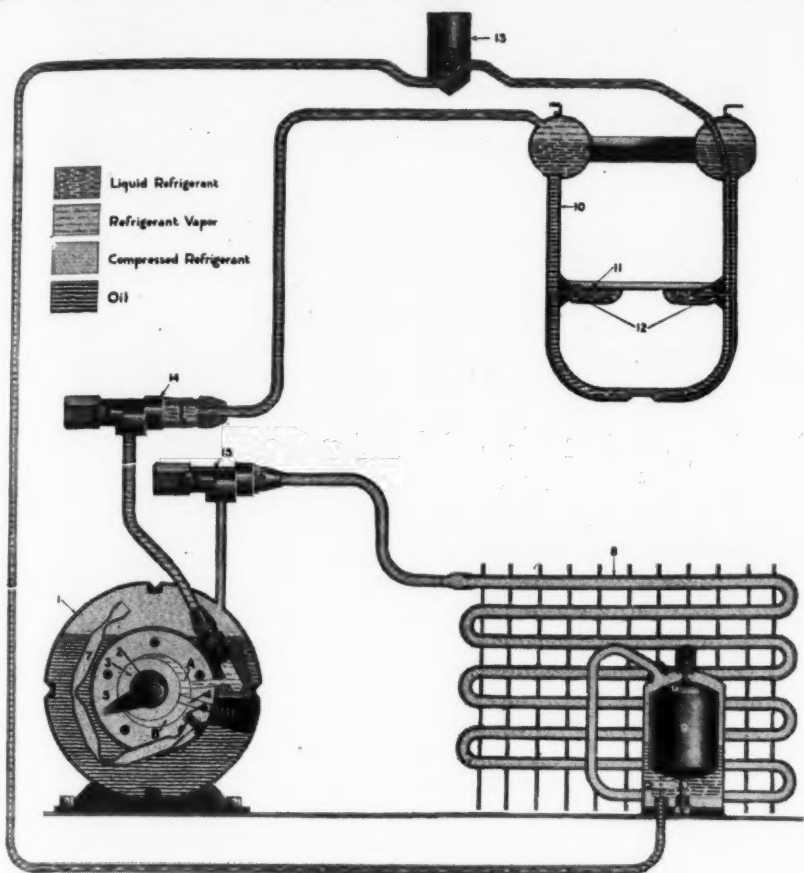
Cross-sectional chart of typical open-type machine with rotary compressor. Key to parts: 1, compressor; 2, compressor shaft; 3, piston; 4, blade; 5, cylinder; 6, discharge valve; 7, acoustic filter; 8, finned tube condenser; 9, float; 10, cooling unit; 11, freezing shelf; 12, injectors; 13, throttling valve; 14, suction service and check valve assembly; 15, discharge service valve.
